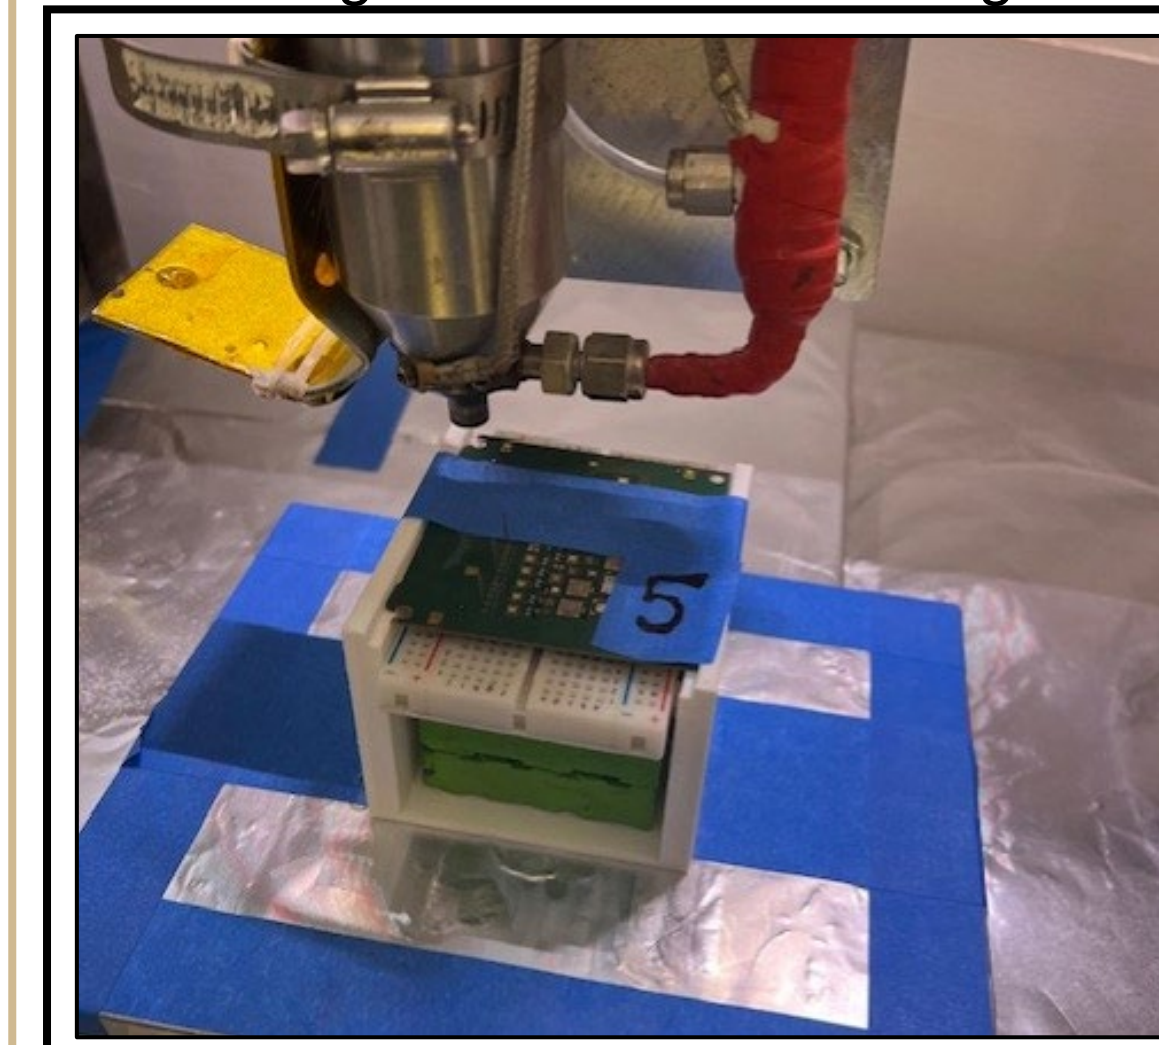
Image of the CAPD deposition nozzle during an unmodified coating test. The PCB is fixed on to a 3D-printed base for secure deposition. The niobium wires are threaded through the PCB and into a solderless breadboard.
